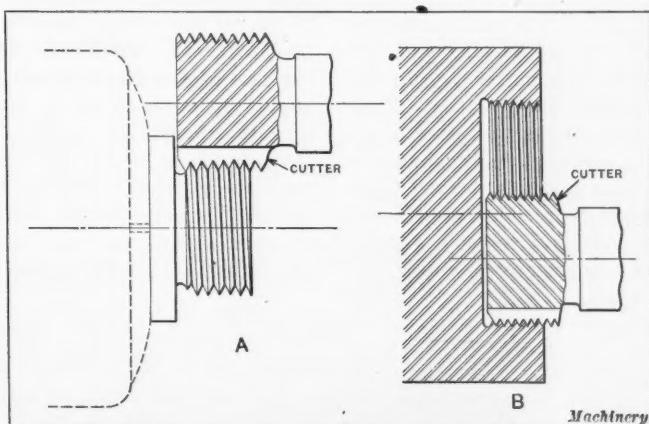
Examples of External and Internal Thread Milling with a Multiple Type of Cutter
